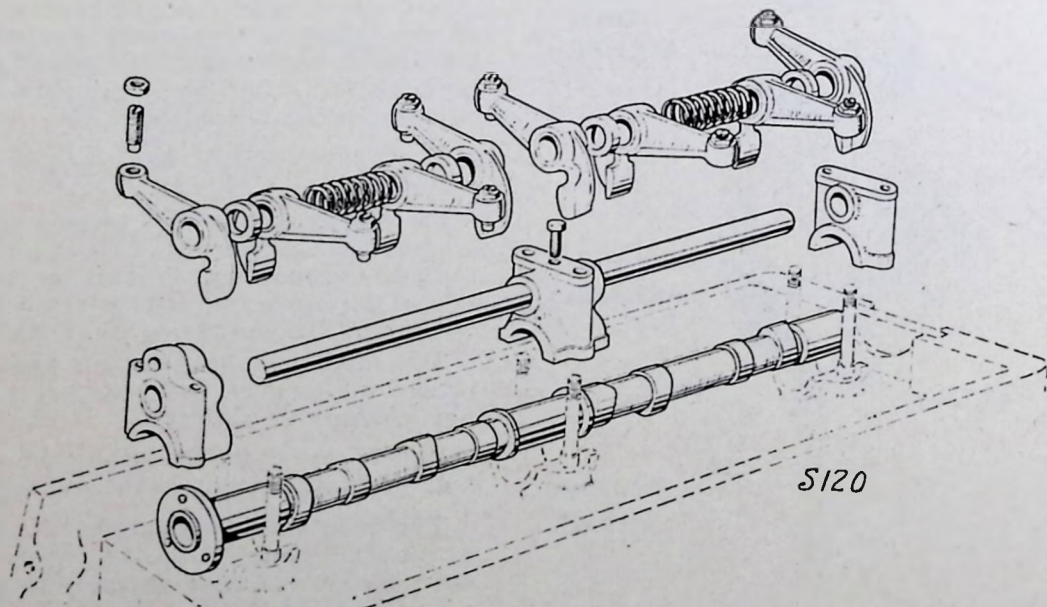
Rocker and camshaft components. (Series I-II.)
